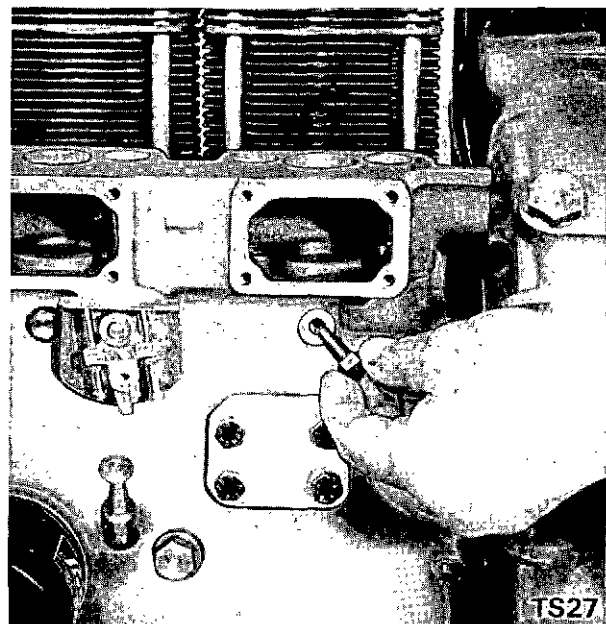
Removing Fuel Pump Tappet Guide Screw
